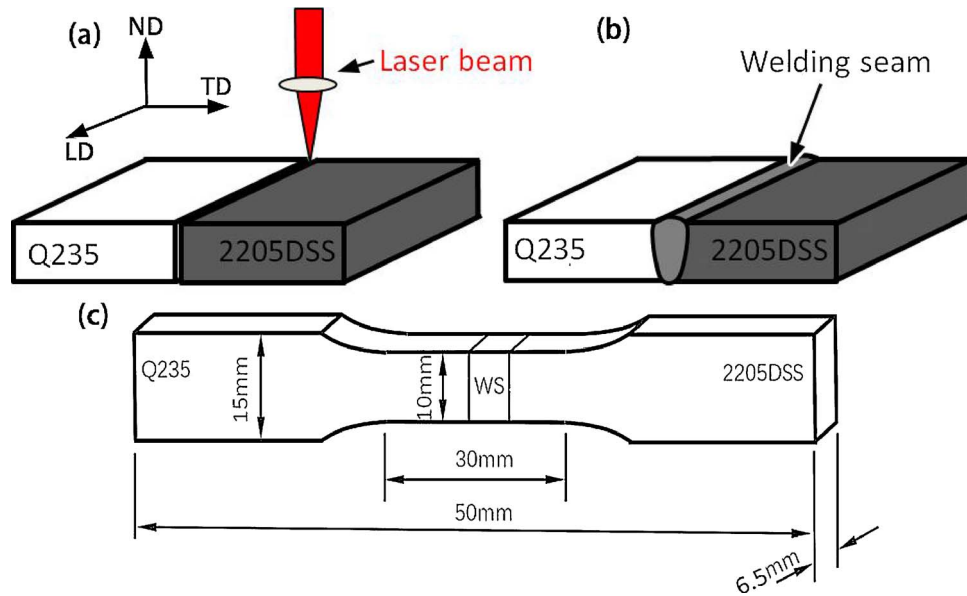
(a) Assembly of the Q235 steel and 2205 duplex steel plates; (b) Schematic of the Q235 steel and 2205DSS dissimilar joint formed via LBW; (c) dimensions of the tensile samples used in this study.
